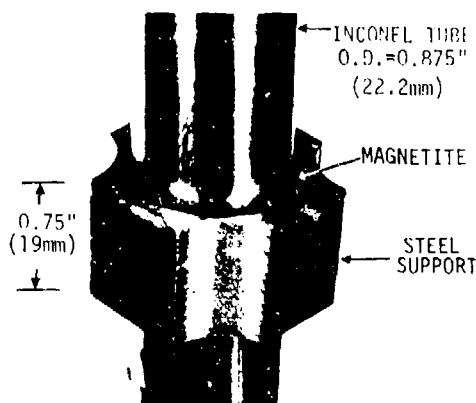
The crevices between the Inconel-600 tubes and the carbon steel support plates may contain corrosion products such as magnetite.
